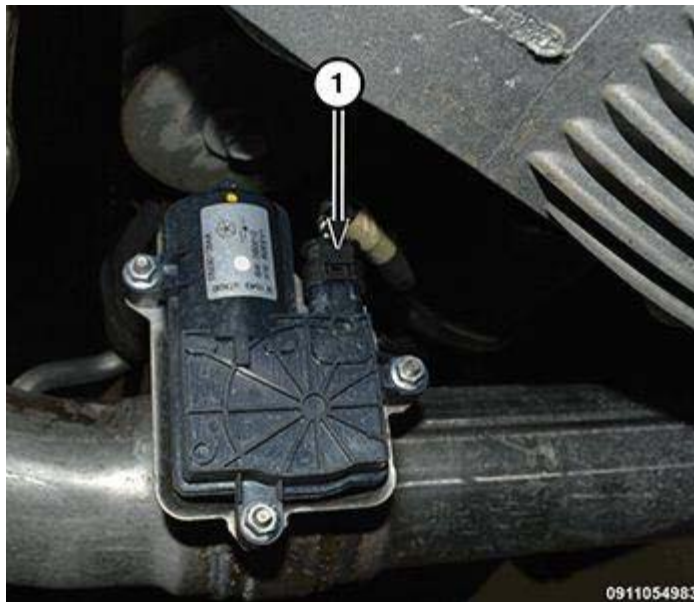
Electronic Active Exhaust Valve Wire Harness Connector
